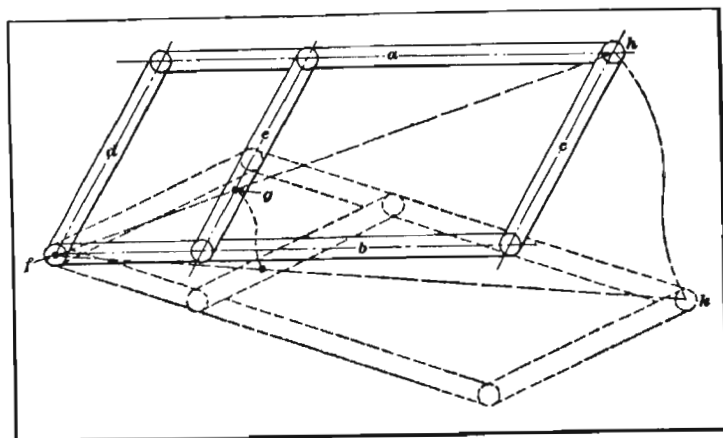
Pantograph for Reproducing Motion on a Reduced or Enlarged Scale
